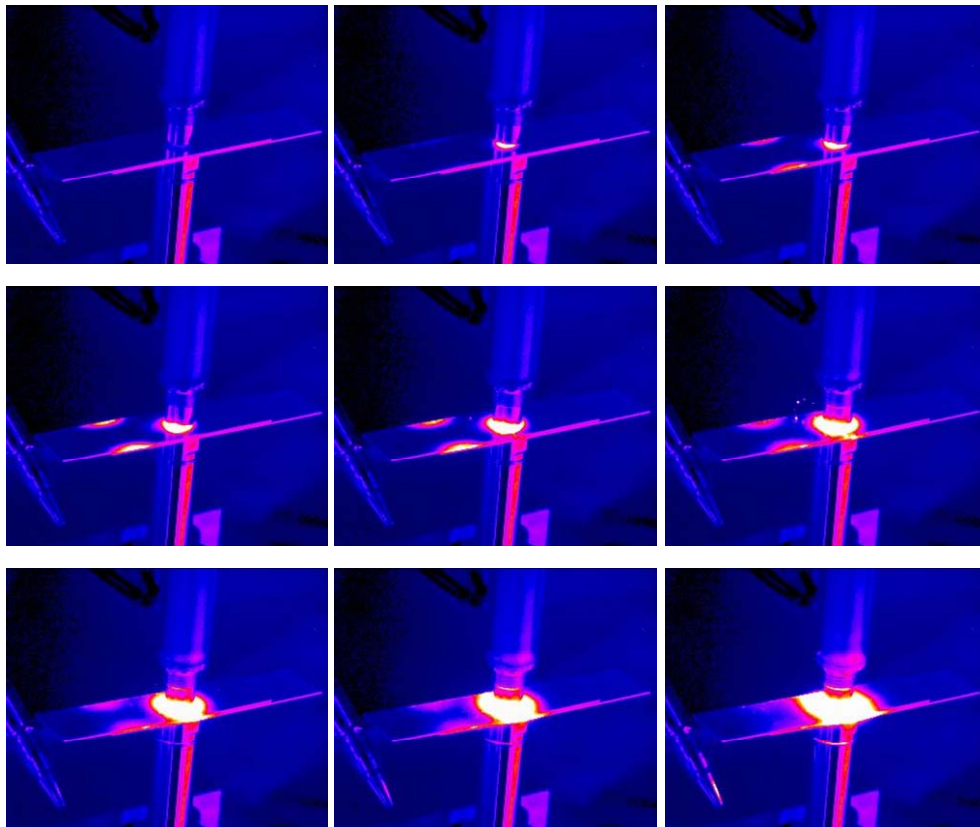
Sequential IR thermography image shots during ultrasonic welding.
